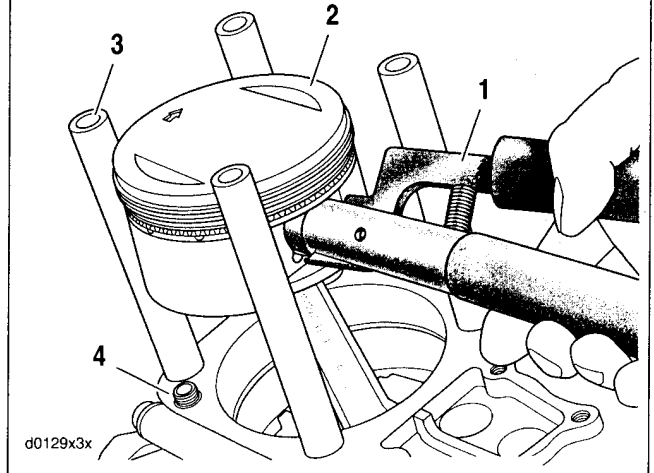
Piston Pin Circlip Removal (Part No. HD-42317)
